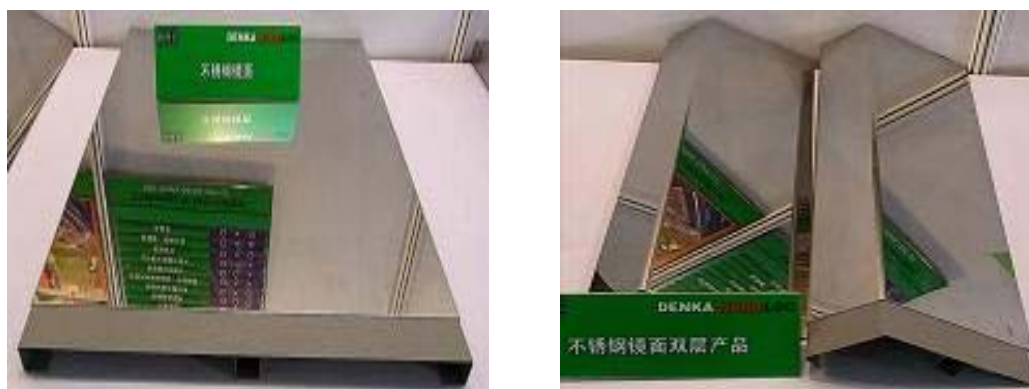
A example of no distortion bonding of mirror finished surface stainless steel part and mild steel part.
